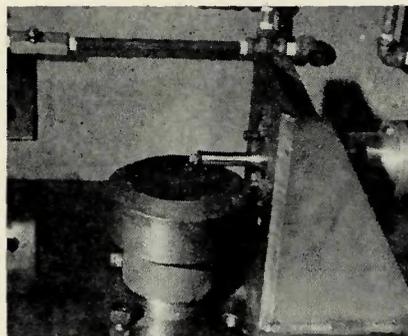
Transducer, amplifying horn, welding tip and anvil
